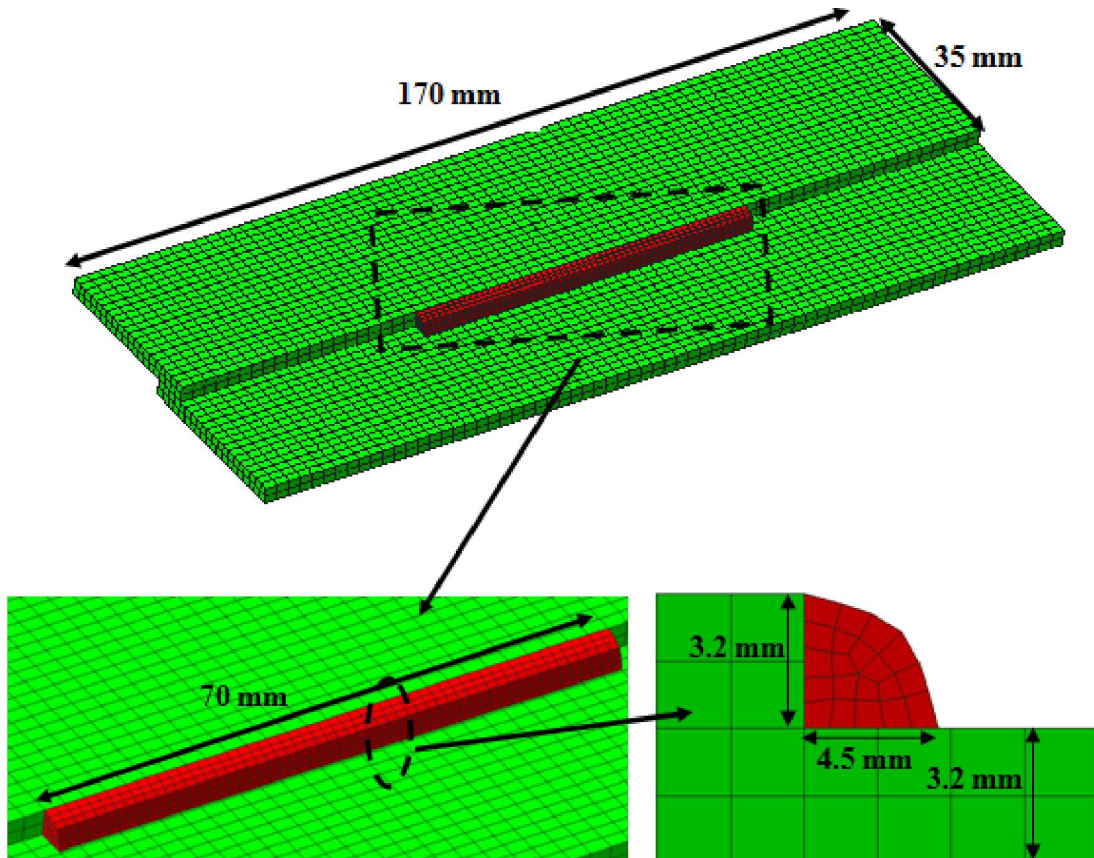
FE model of the lap-joint specimen and zoomed views of weld bead
